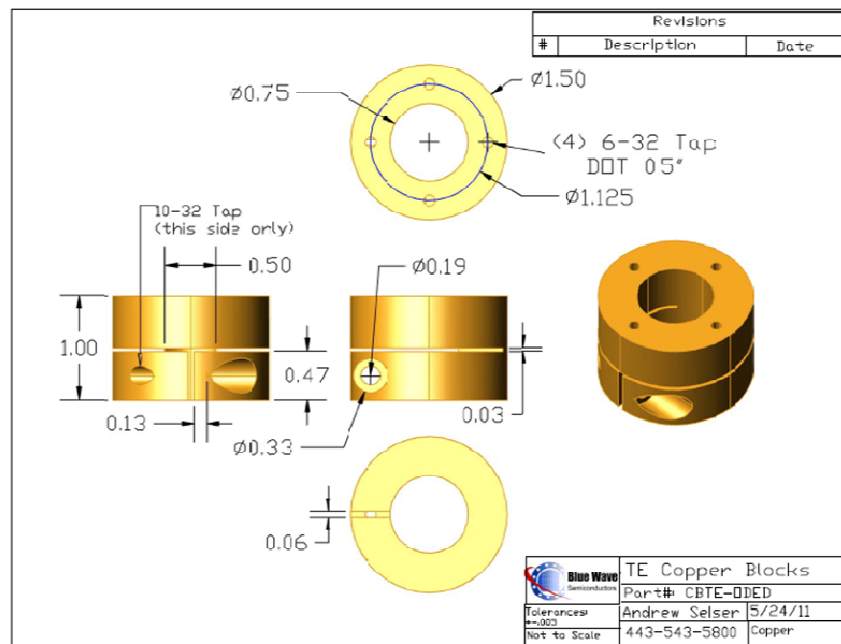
CAD drawing: Cu block in electrodes for thermal evaporation.
